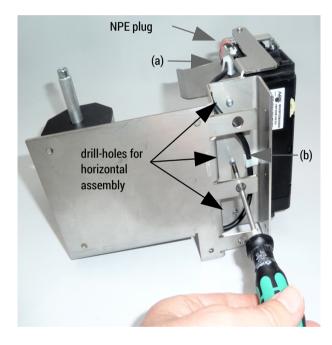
Vertical assembly / roll holder with paper axis for 3" roll core
